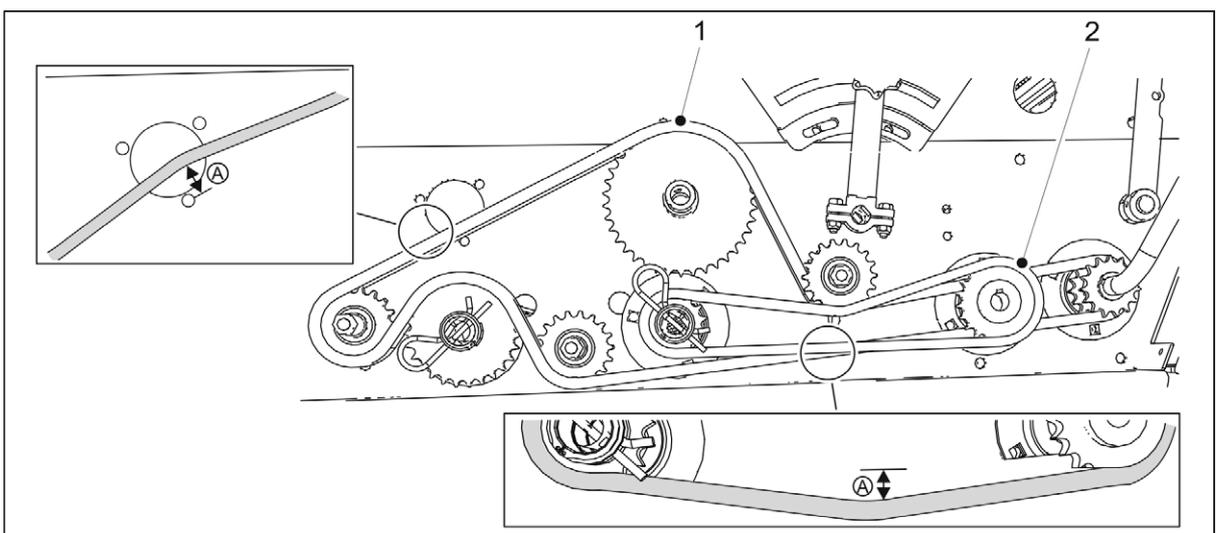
182. Checking the tightness of the transmission chains in a machine with a gearbox on the seed side
